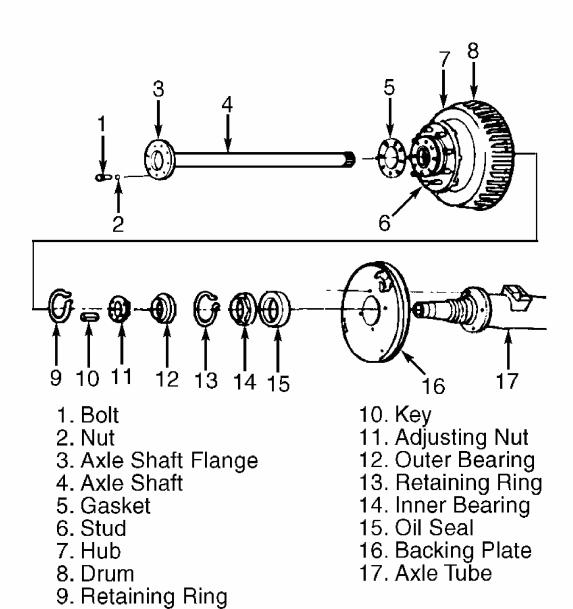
Exploded View Of Rear Axle Shaft, Hub & Brake Drum Assembly (Full-
